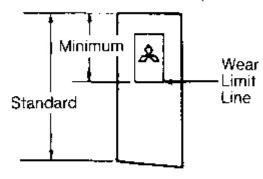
Testing Generator Stator, Rotor & Brushes (2 Of 5) Courtesy of MAZDA MOTORS CORP.
